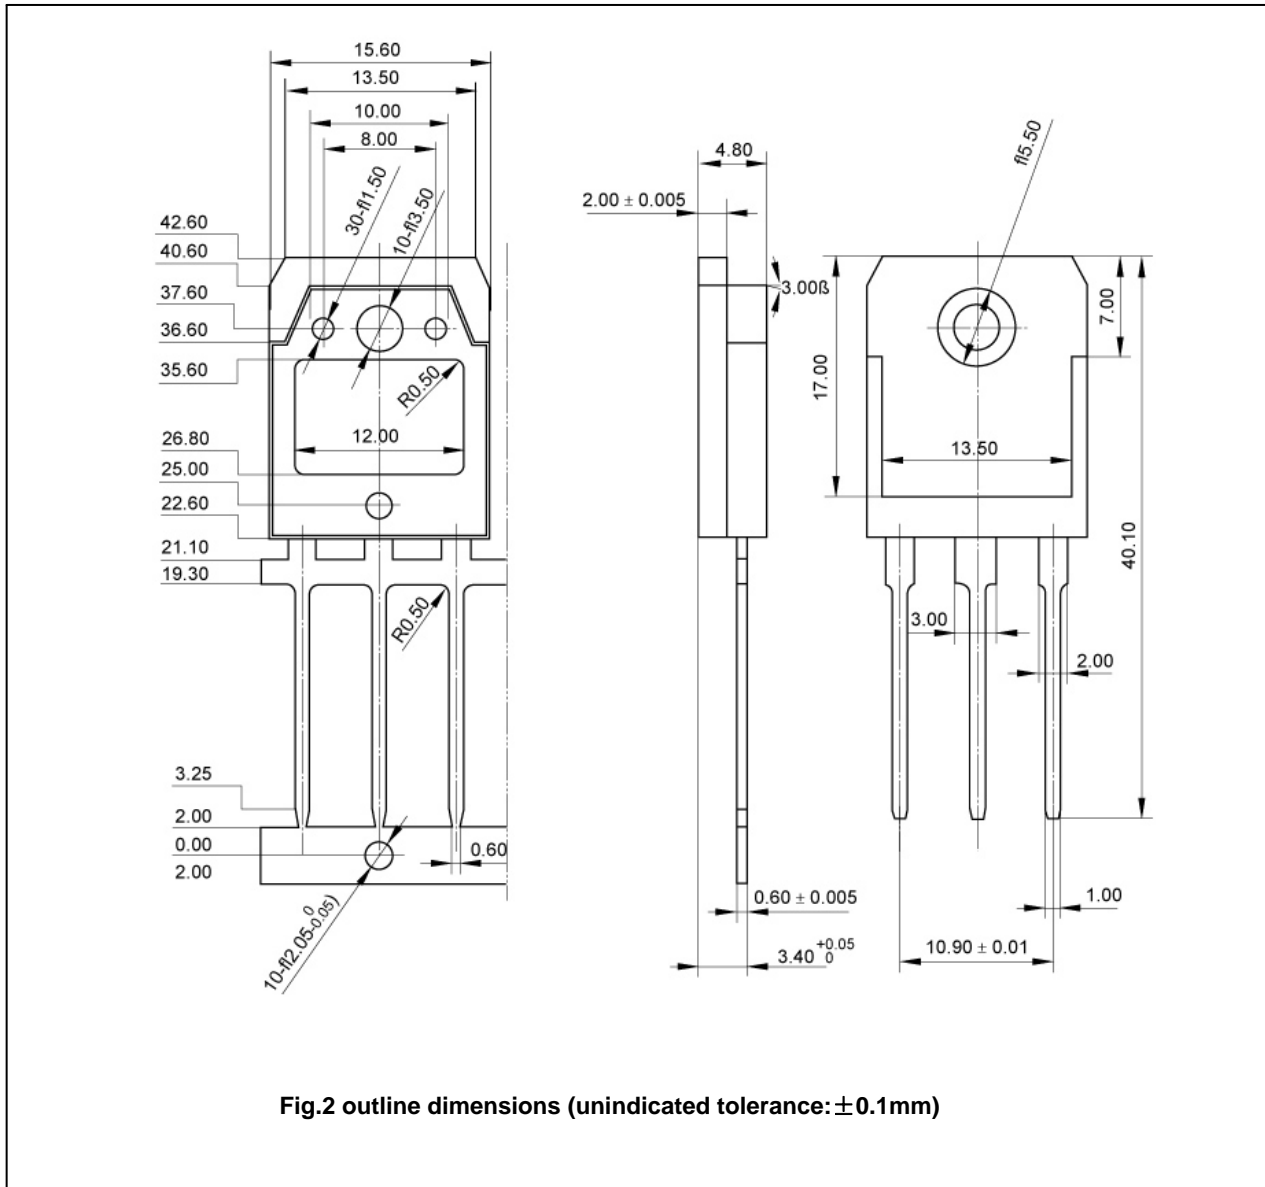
outline dimensions (unindicated tolerance:  $\pm$ 0.1mm)
